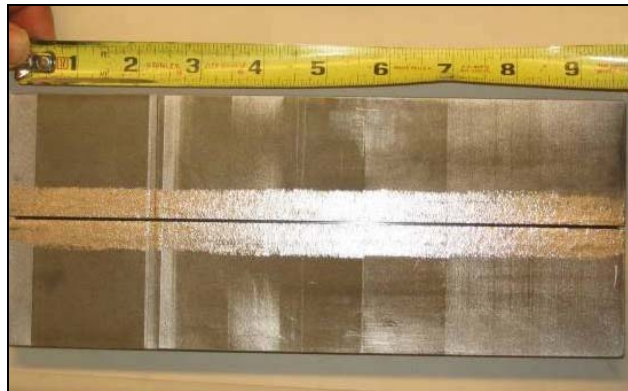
The FSX-414 test plate with a 1.5 mm wide groove machined in the centre.
